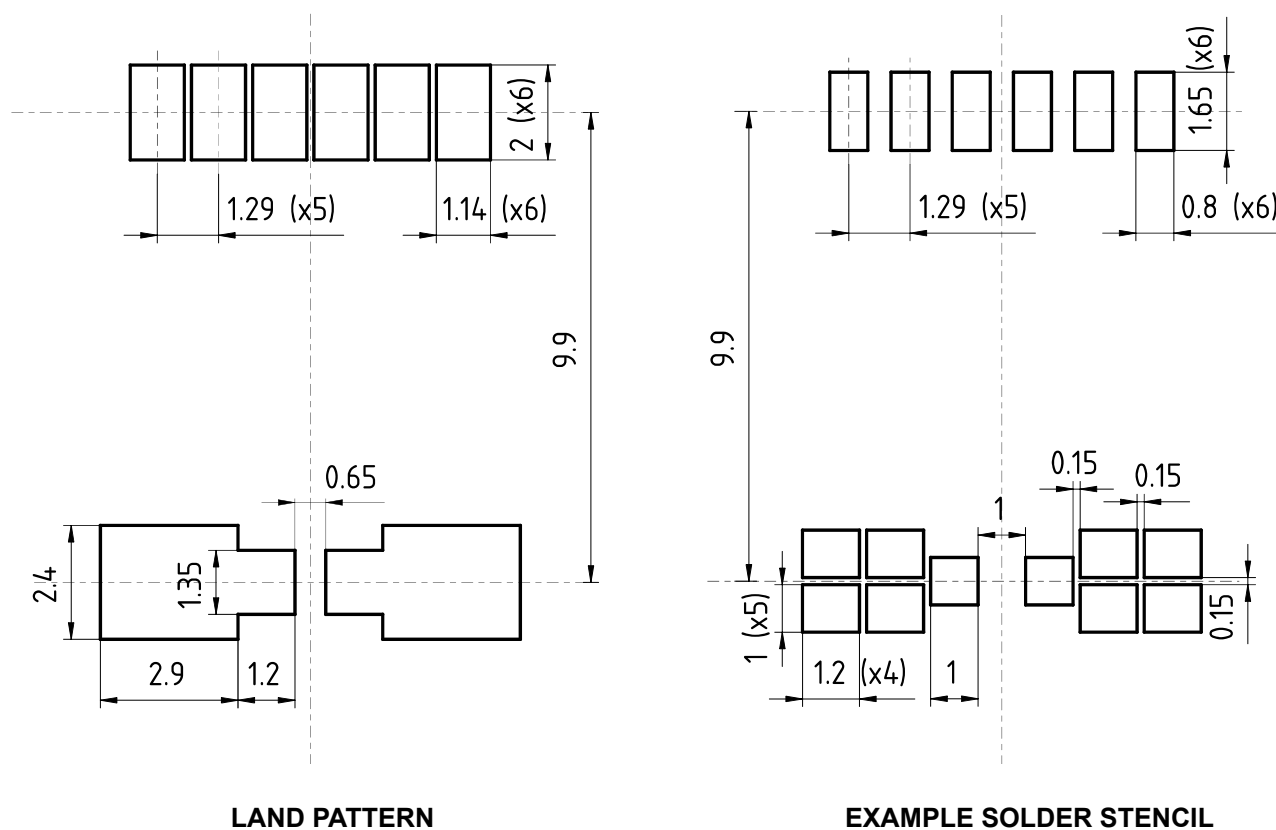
LX Package Land Pattern And Example Solder Stencil. All dimensions are in mm.
